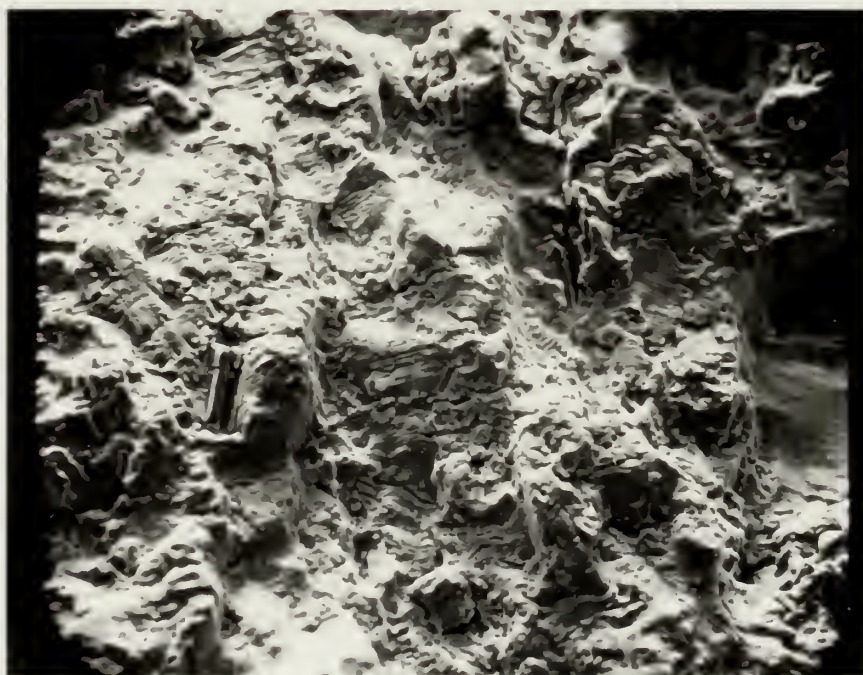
Inconel 625 plate fatigue fracture surface. 630X.
